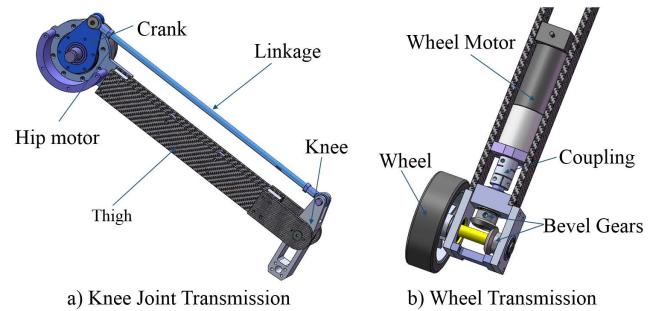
Knee joint and wheel transmission mechanism of the robot.
